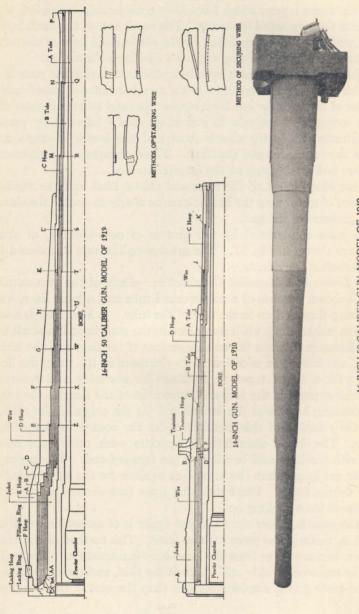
shows the 16-in., 50 caliber Gun, Model of 1919, which is of the wire-wrapped type and is representative of recent practice in the construction of guns by this method. This gun also contains two tubes. As in the case of built-up guns, the inner or A-tube is provided to facilitate relining when the rifling has become badly worn. In assembling, the jacket is shrunk over the rear of the B-tube. Over the length of this unit of tube and jacket, from the locking ring at the breech to the P-ring at the muzzle, is wound an envelope of wire. The wire is of square cross section, approximately 0.1 in. on a side.
